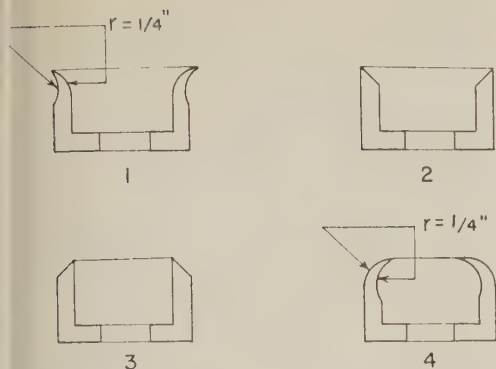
Cross section through overflow nozzles used for draining rainfall from evaporation pan.
